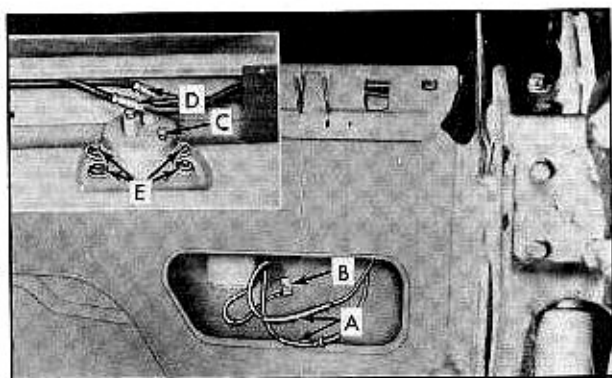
Removal of Hydro-Lectric Motor and Pump
